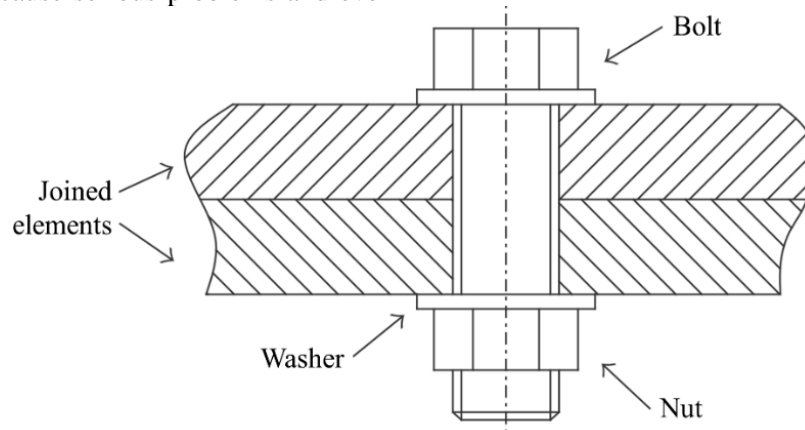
Bolted joint (Cıvatalı bağlantı) [1]
